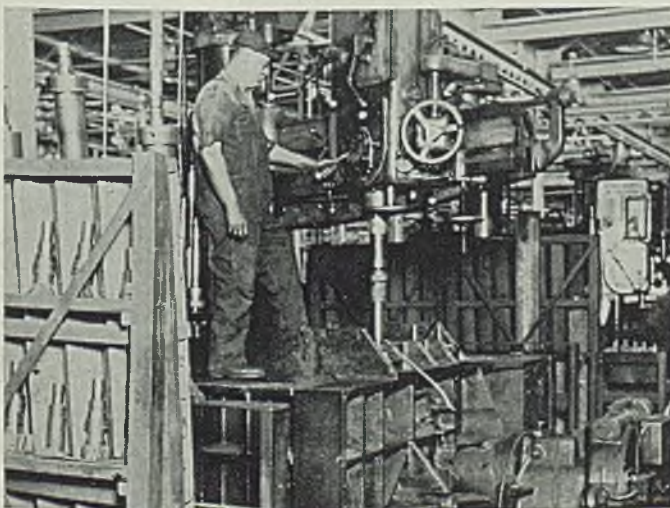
Drilling and boring jig to accommodate milling machine column, weighing 7½ tons
